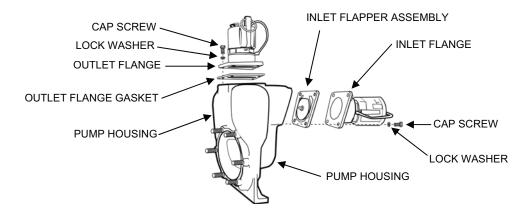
P1/P2 Pump Inlet Flapper Assembly and Outlet Flange Gasket Replacement.
